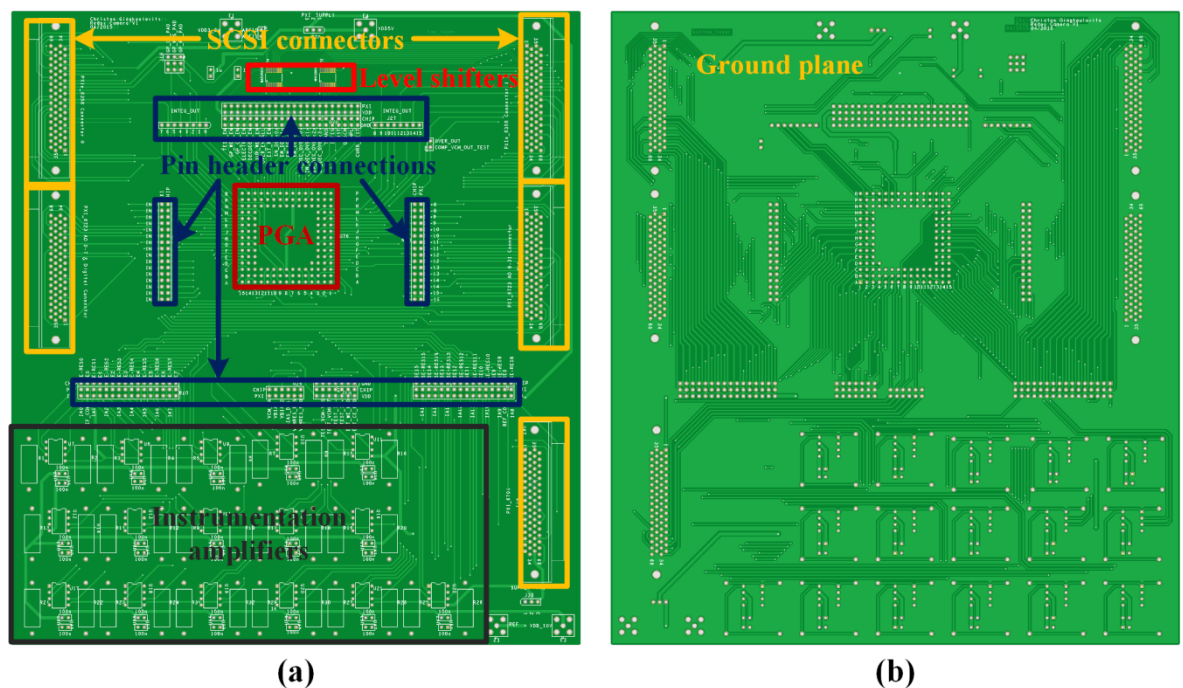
Custom designed PCB (a) front and (b) back view pictures extracted from the design files by Eurocircuits [8] with added details of the components.
